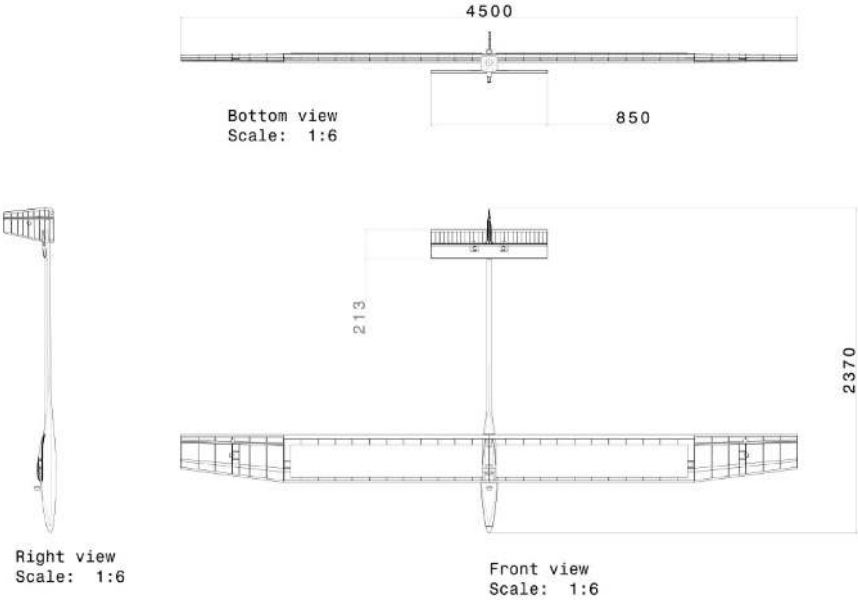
Three view drawing of the concept aircraft with its main dimensions.
